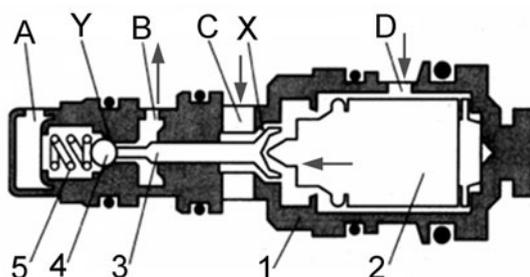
Displacement adjusting valve for axial compressor. Components: 1 body valve, 2 elastic capsule (with bellows), 3 stalk, 4 sphere, 5 spring. A connection with sending manifold (HP), B exit to interior carter, C return to carter, D connection with intake manifold (LP), X narrowing carter/low pressure, Y narrowing carter/high pressure.
